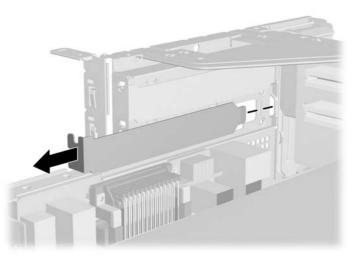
Removing a PCI Riser Card Expansion Slot Cover
